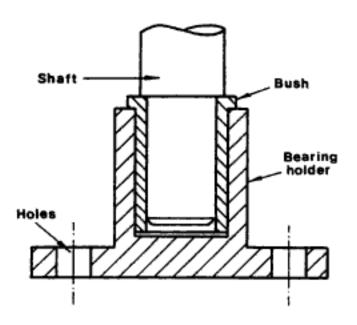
Sectional assembly drawing of a shaft, bush and bearing holder
